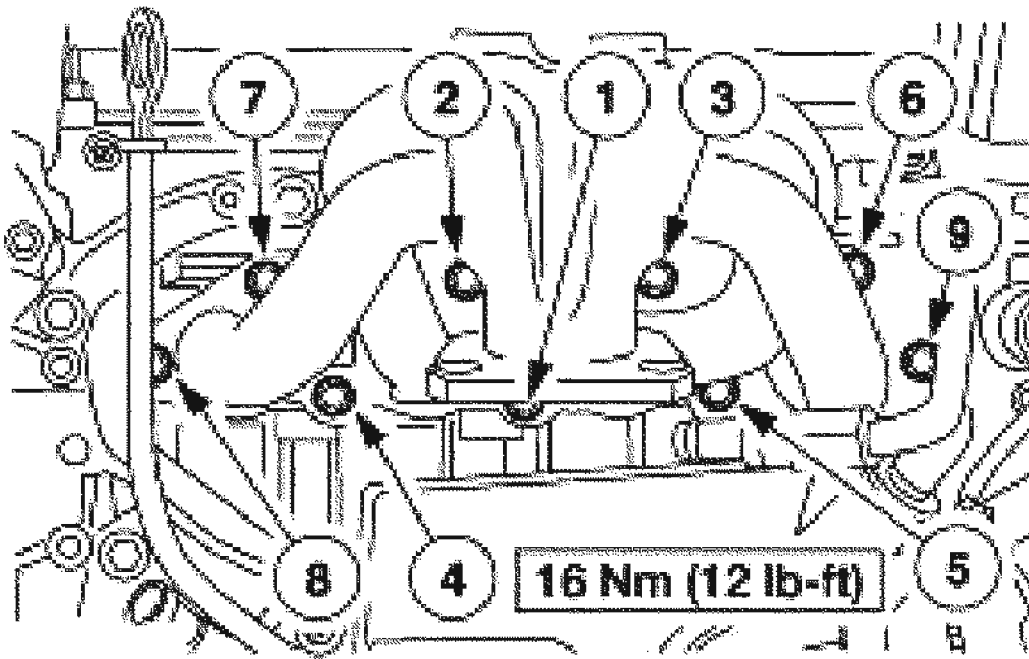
Removing Exhaust Manifold Nuts & Bolts
